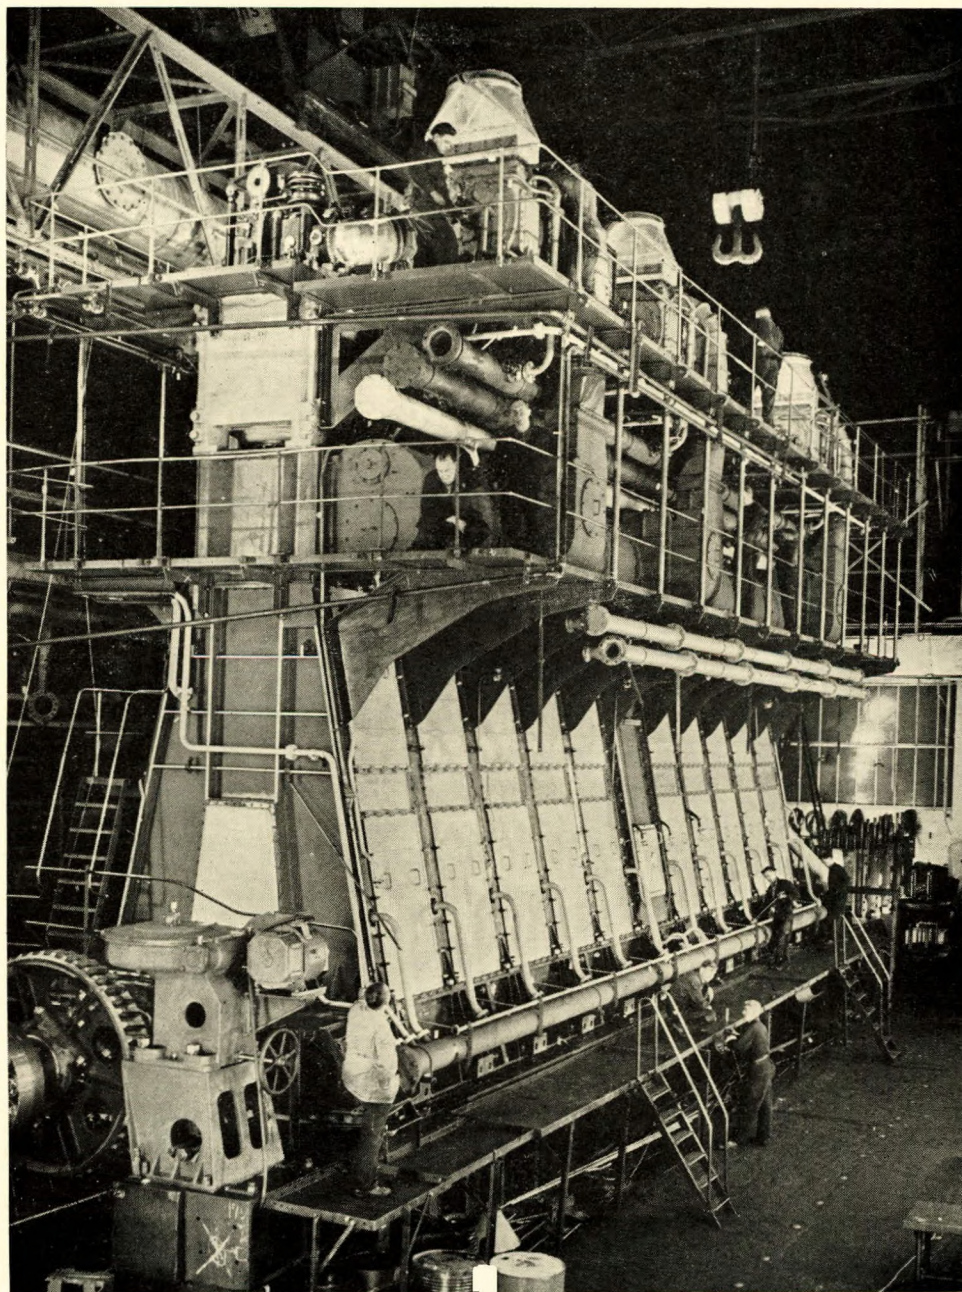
Ten-cylinder turbocharged poppet valve engine: cylinder diameter 740 mm., stroke 1,600 mm. and continuous output 12,500 b.h.p. at 115 r.p.m.
